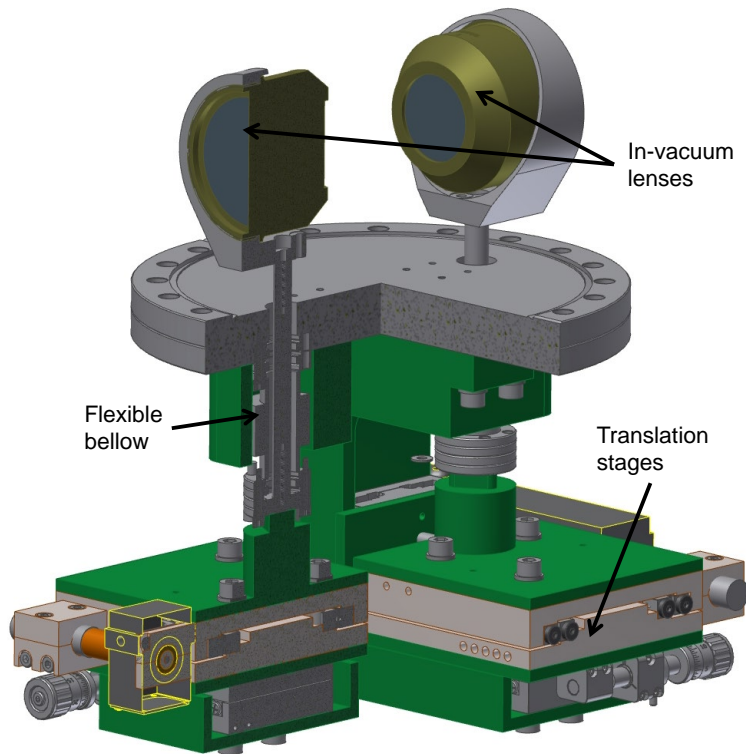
Drawing of the assembly of the in-vacuum objectives. Two objectives are mounted on the vacuum bellows separately inside the chamber. A three-dimensional translation stage is attached to the vacuum bellows outside the chamber. The ion trap is placed between the objectives, not shown here. (Figure by courtesy of Daniel Kienzler)
